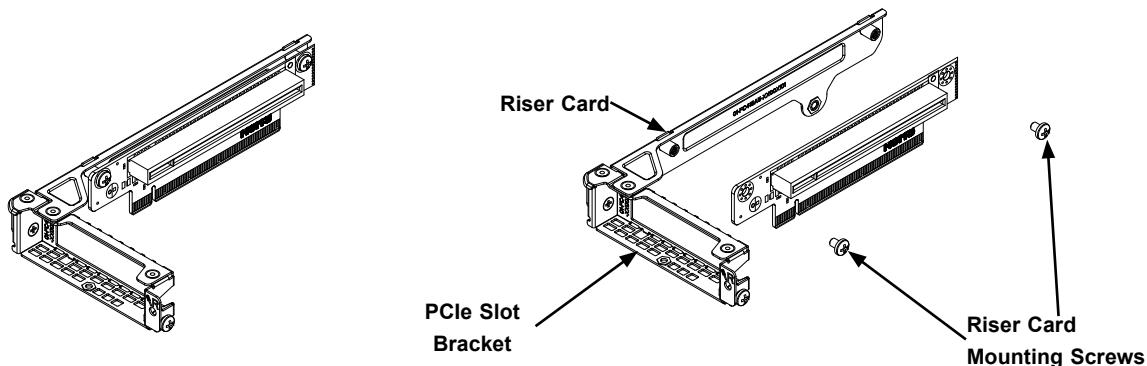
Assembling the PCIe Slot Bracket and Cards
